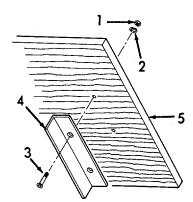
Clothing Sewing Machine Tray, Removal.
